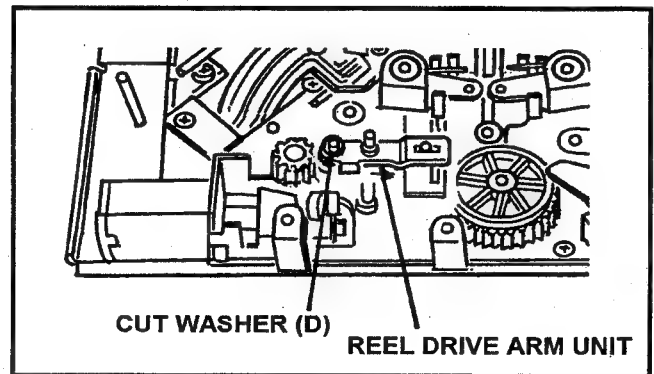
Removal of Reel Drive Arm Unit
